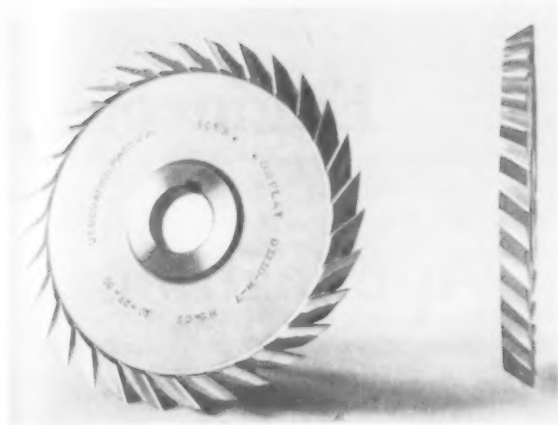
A 60 deg included angle high rake cutter. Radial rake is 34 deg; axial rake is 10 deg. Operation: milling high speed steel chasers. Speed, 187 sfpm; feed, 20 ipm; chip load, 0.005 in. per tooth. Cutter life averages 1000 pieces per hour.
